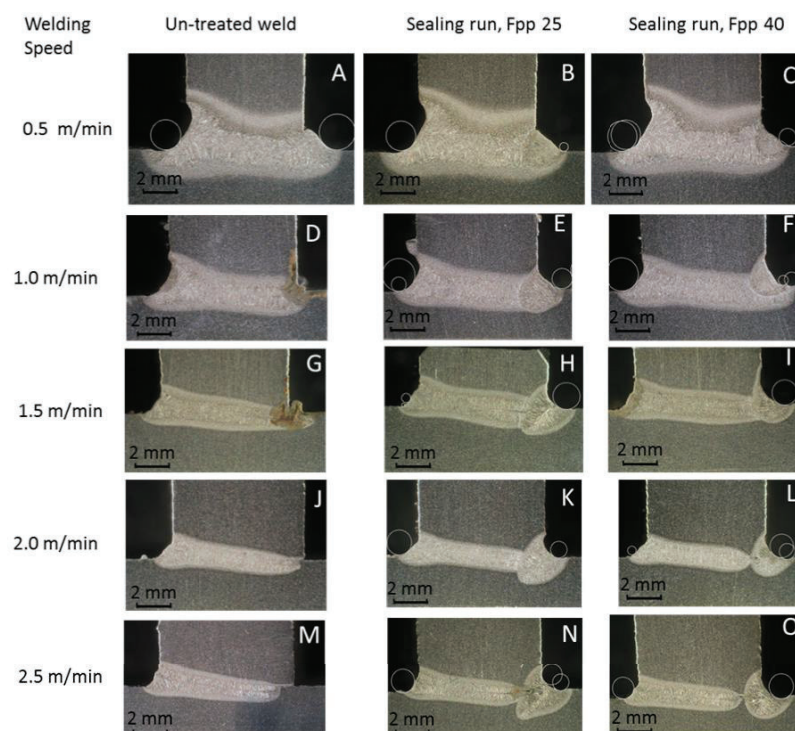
Macrographs of the cross-sections of the weld samples with and without welding of the sealing run.
